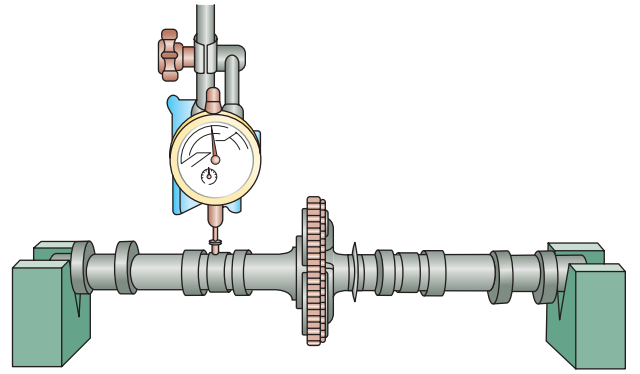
A dial indicator in use measuring a camshaft from a power equipment engine.
